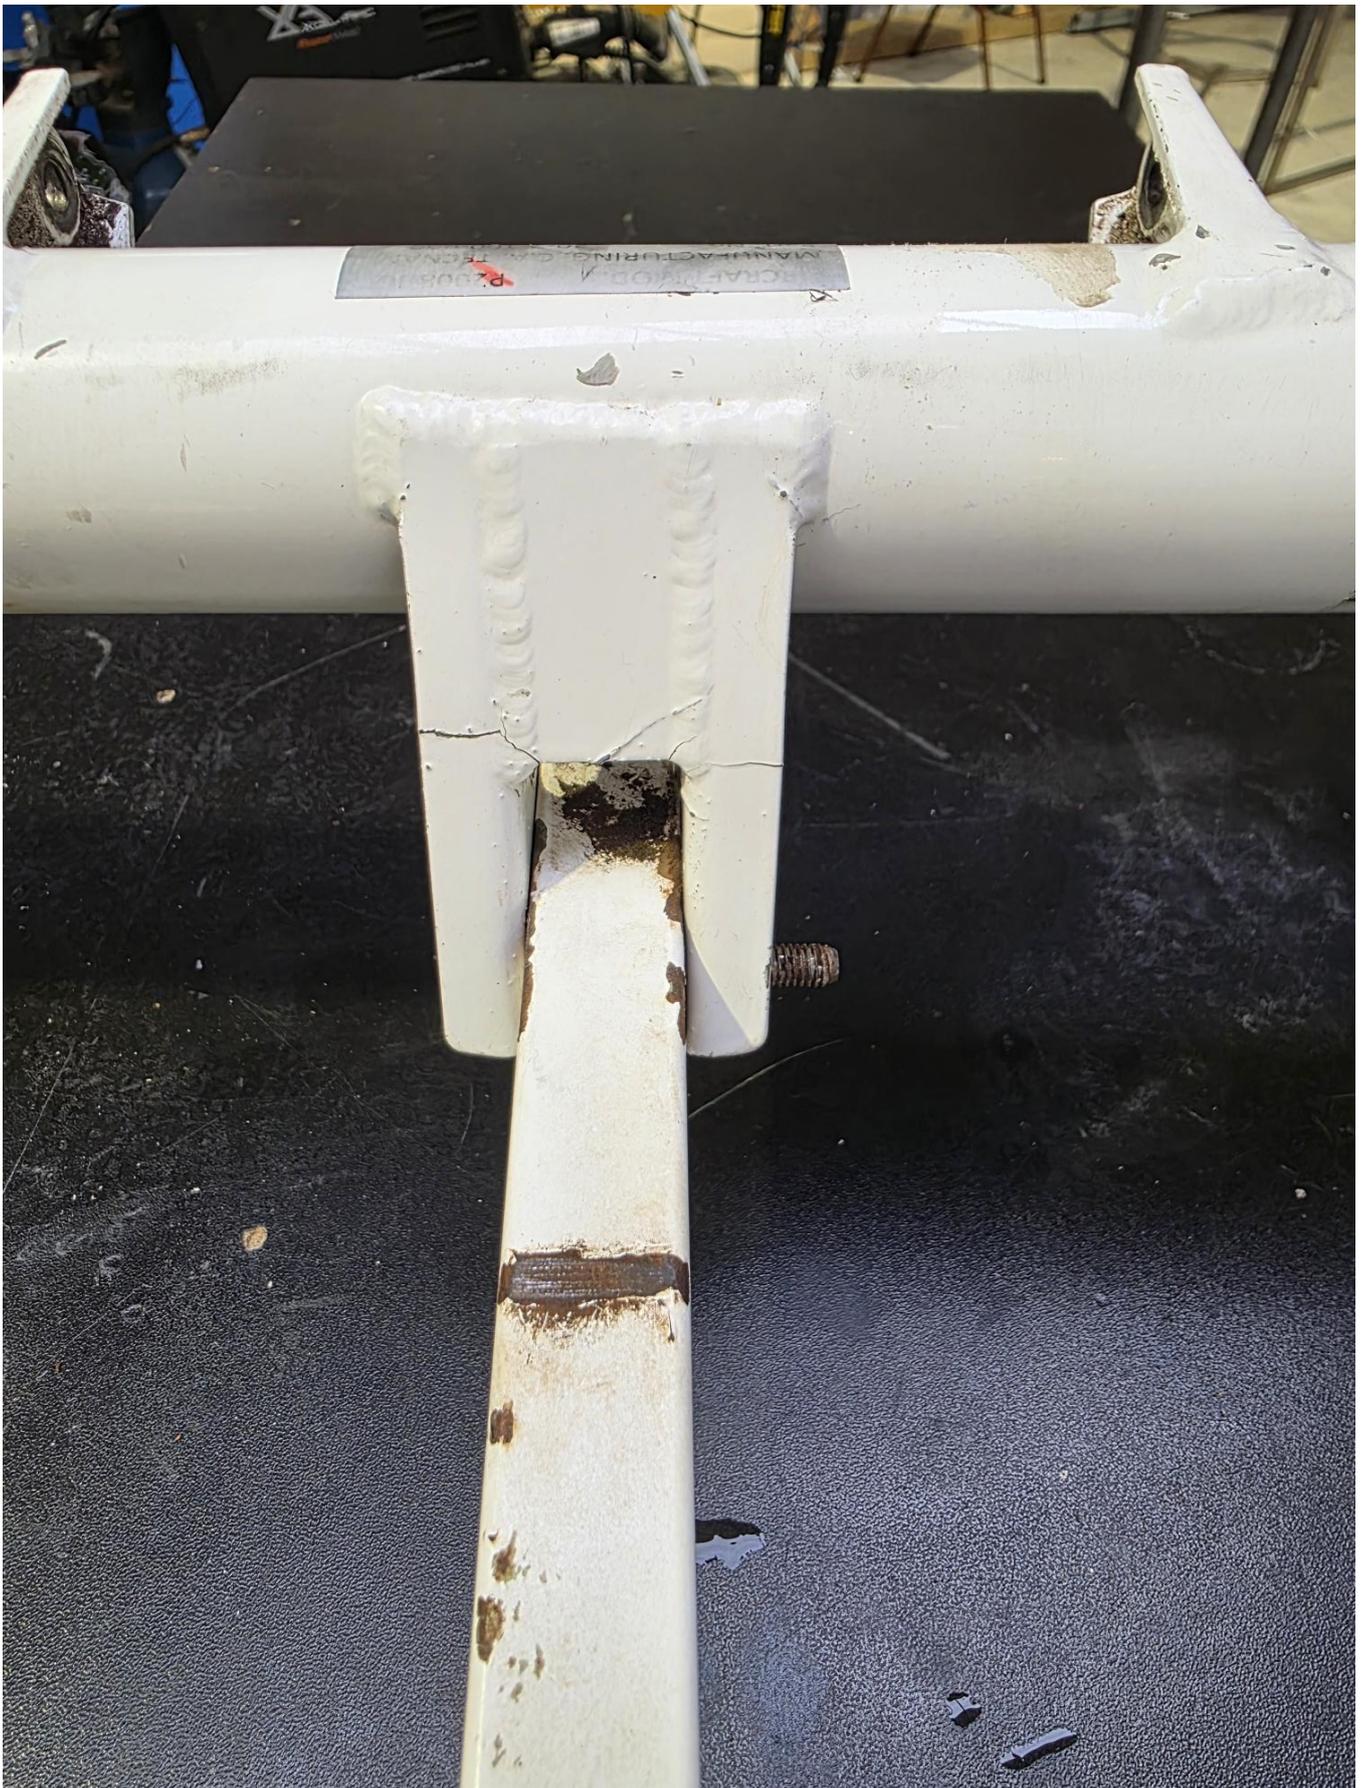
Stabilator Torque Tubes – Cracks in Mass Balance Weights Attachment
